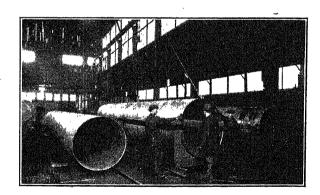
Frames of Special Design Support the Two 30-Ft. Half Sections of 48-In. Pipe When Being Tack Welded by Hand From the Inside
